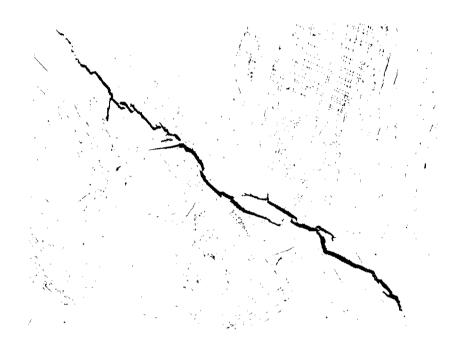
CRACKS IN WELD-METAL ARC WELD IN TITANIUM - 0.13 PER CENT NITROGEN ALLOY
